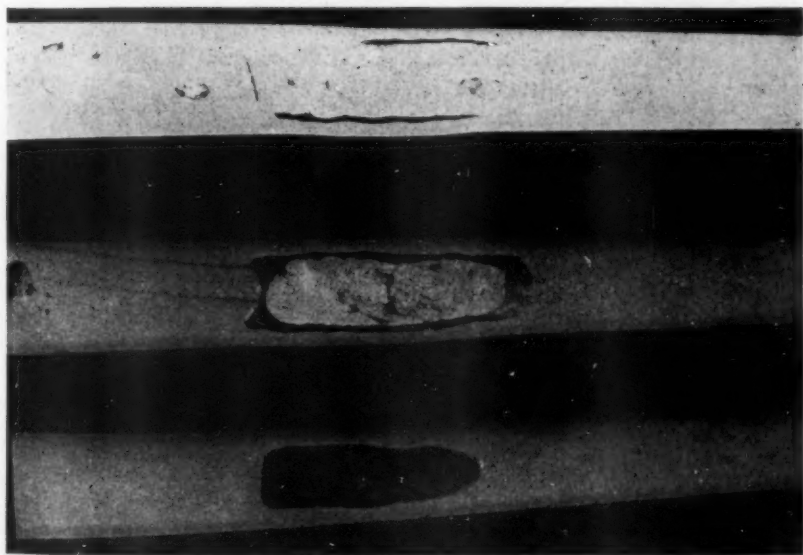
COLD SHOT IN A PRESSURE MOLD CASTING. MAGNIFICATION, 3X.
